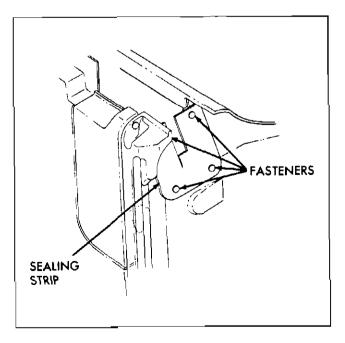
Front Door Lock Pillar Sealing Strip
